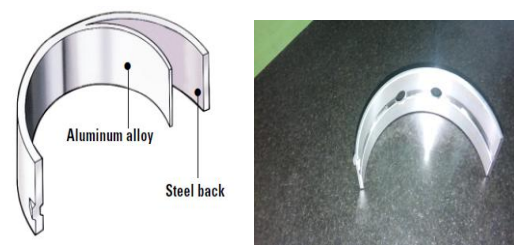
Aluminium alloy bearing (Bi-metal bearing)
